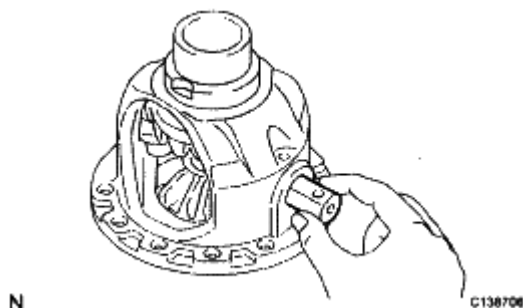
Identifying Front Differential Side Gears, Side Gear Thrust Washers And Front Differential Pinions
